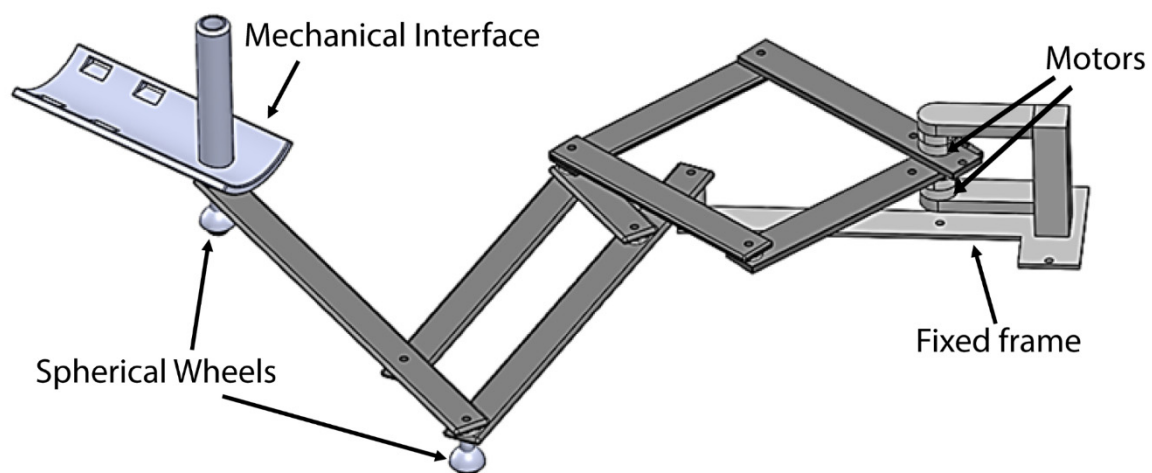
A CAD design of the proposed mechanism including a mechanical interface and wheels.
